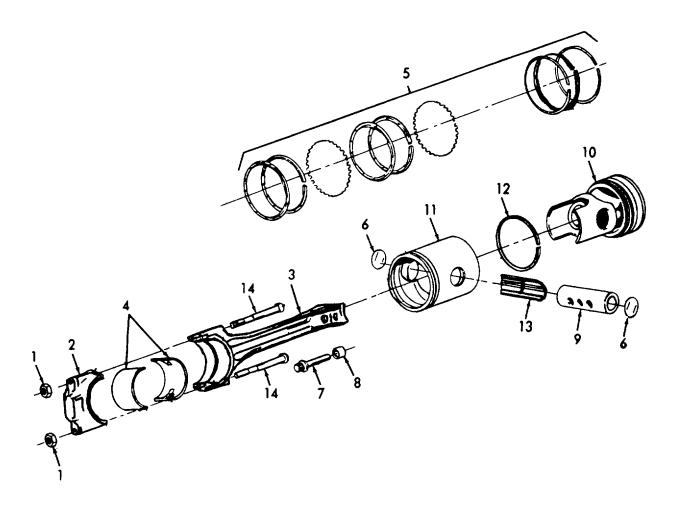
Pistons and Connecting Rods, Removal/Installation.
